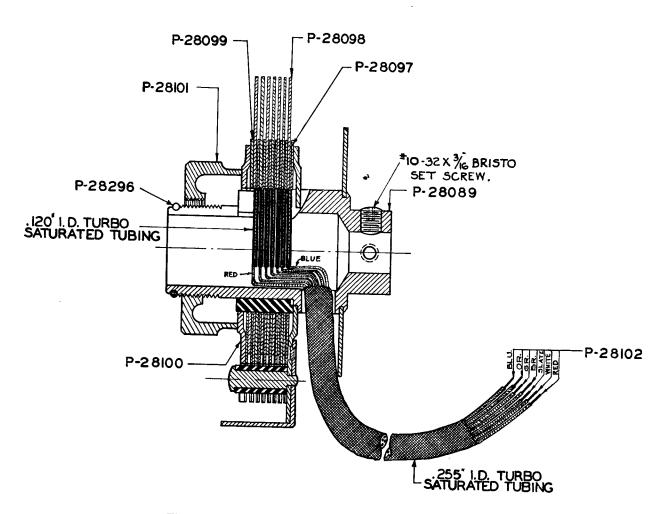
Section View of Flash Tuner Contactors Assembly.
